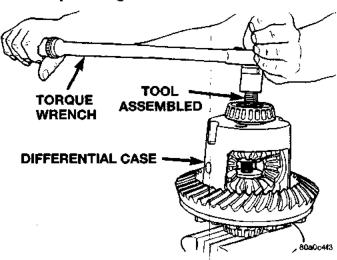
Tighten Belleville Spring Compressor Tool—Shown With 696\$-A Holder
